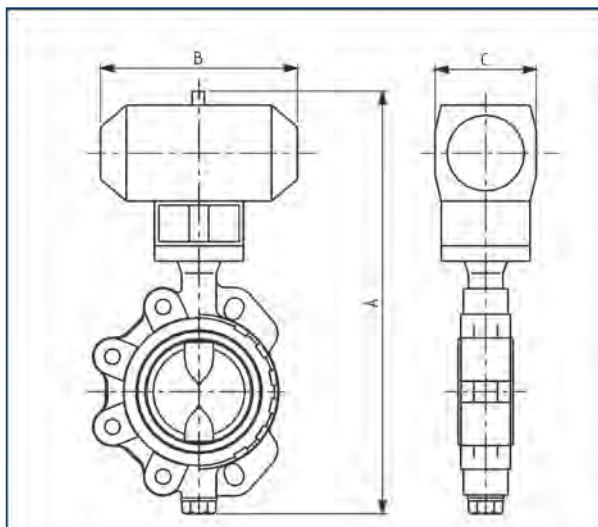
The PRS butterfly valve with a piston-type pneumatic actuator
